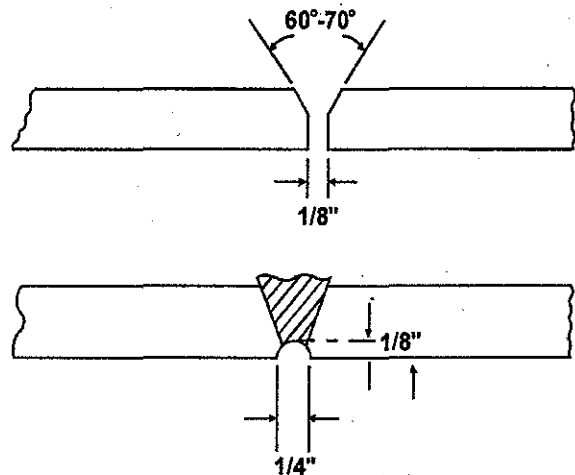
METHOD OF MAKING HOT CRACKING TEST PIECE
